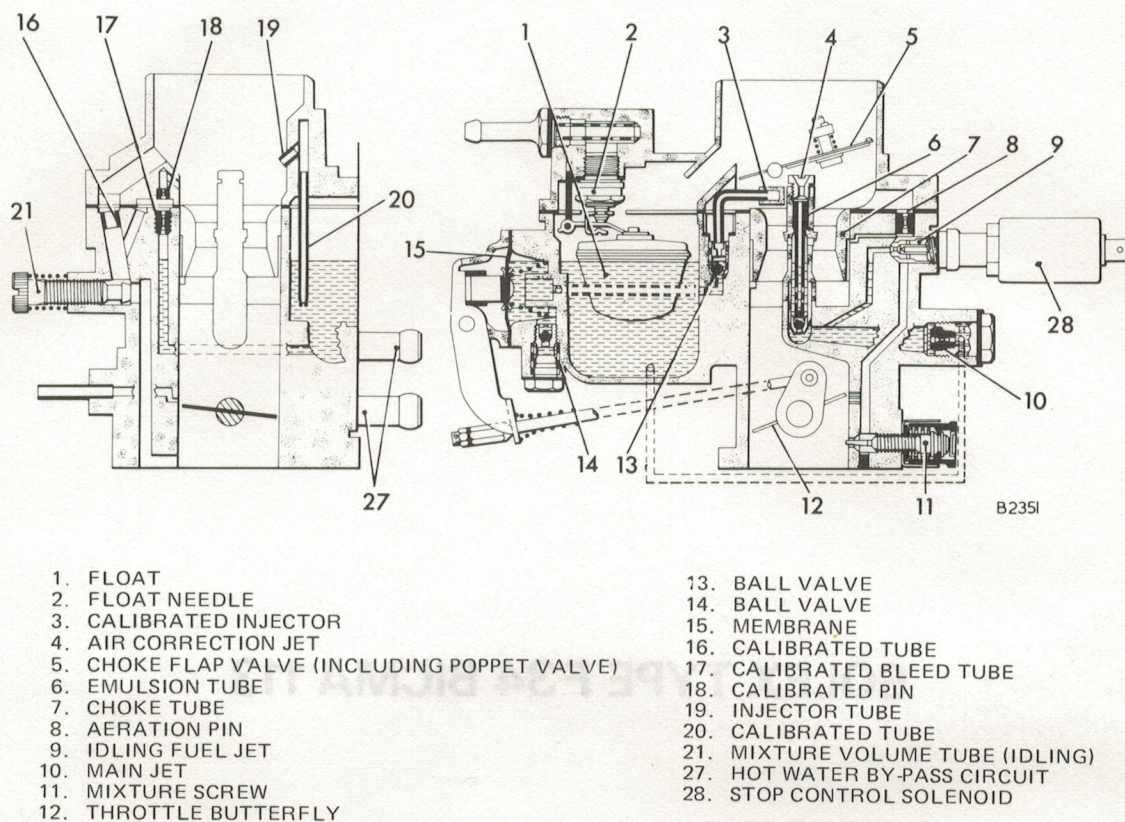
Section of Solex carburettor – F34 BICMA 113
